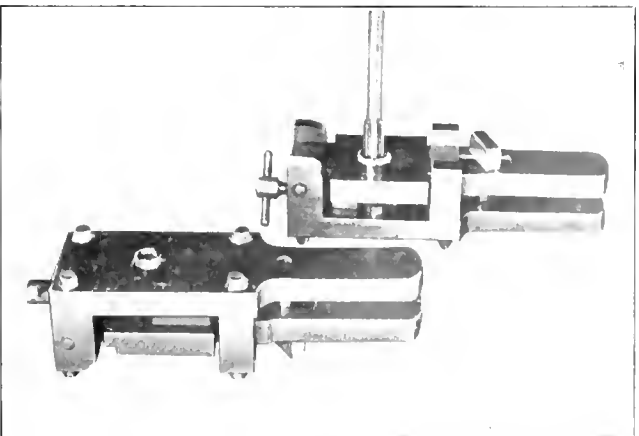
The Jigs shown in Fig. 36 Closed and Ready for Use
